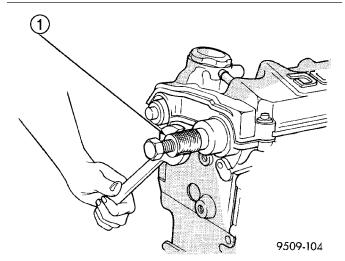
Camshaft Oil Seal - Removal With C-4679A
